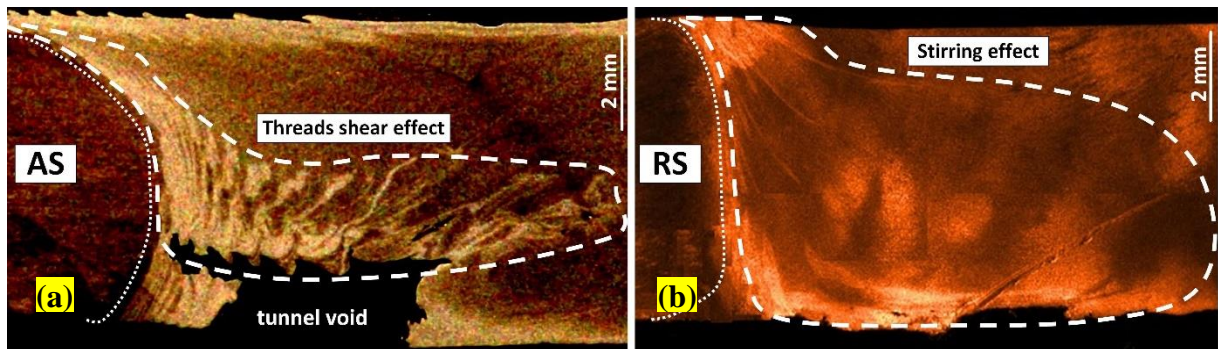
The cross-sections of the stirring zone showing the internal flow details for the AA6082-T6 BFSW weld sample; (a, b) the entry zone; the AS and RS transverse sections, respectively.
